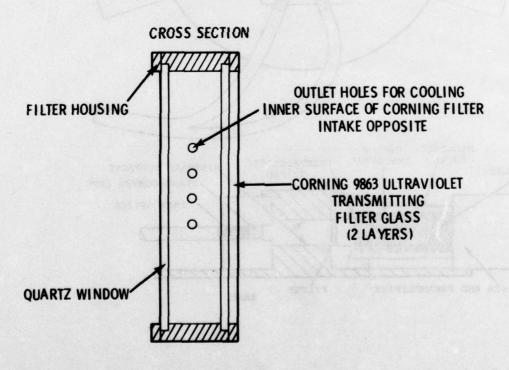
Assembly for Mounting and Cooling the Visible-Band Blocking Filter.
